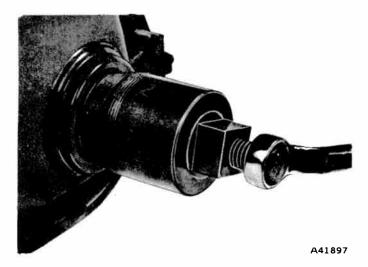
A-27 Timing Chain Cover Oil Seal Removal
